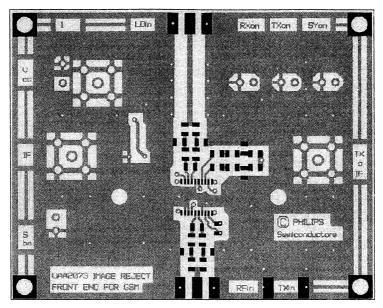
UAA2073XM Demo Board - Layer 1 Layout
